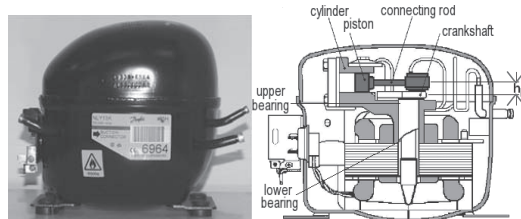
Picture and schematic draw of a hermetic reciprocating compressor.
